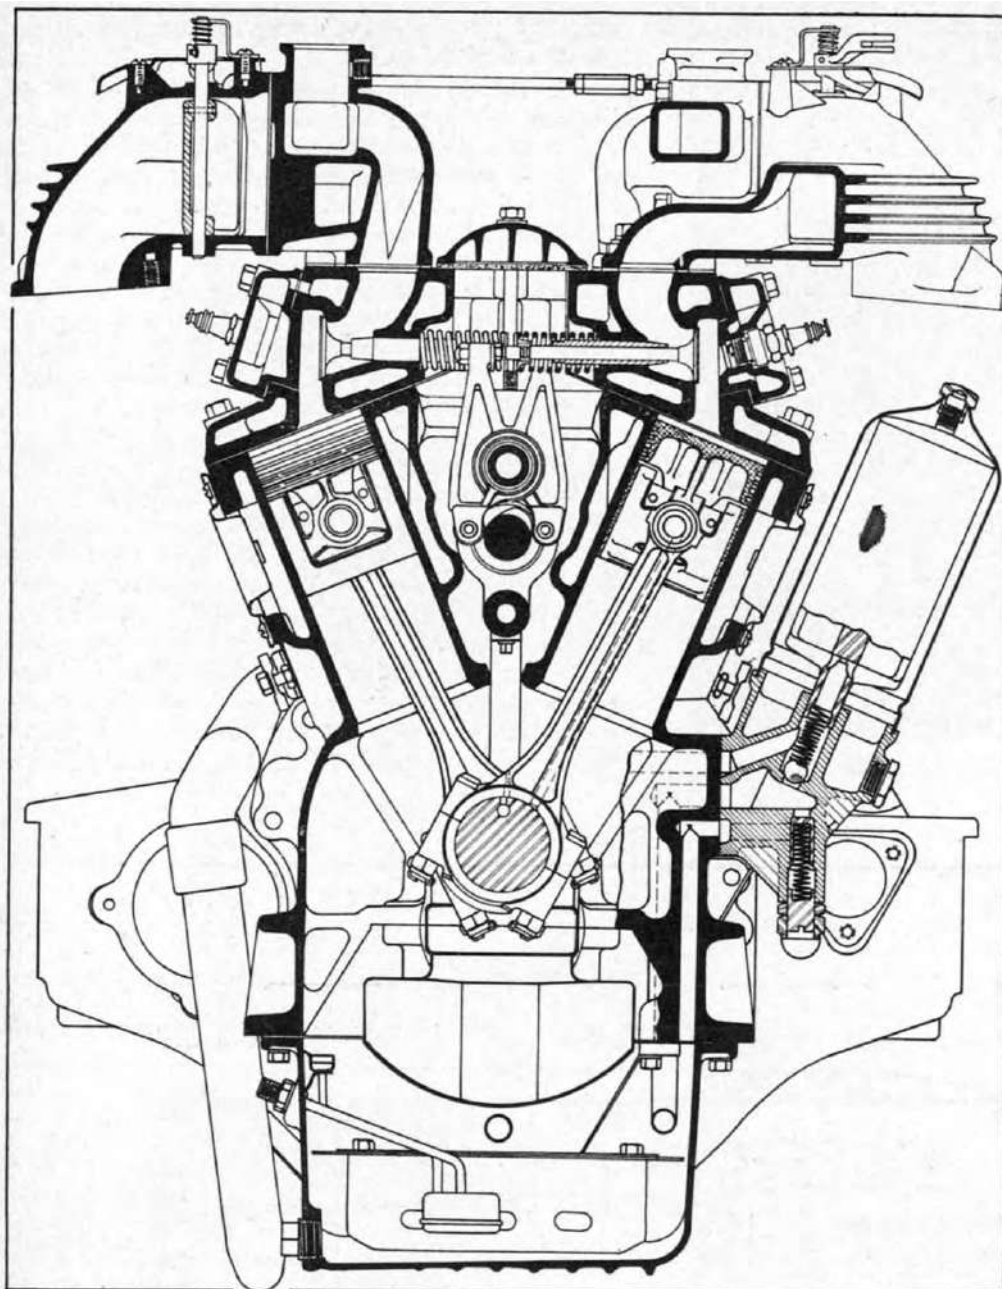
Cross section of the engine showing pistons, connecting rods and valve mechanism
